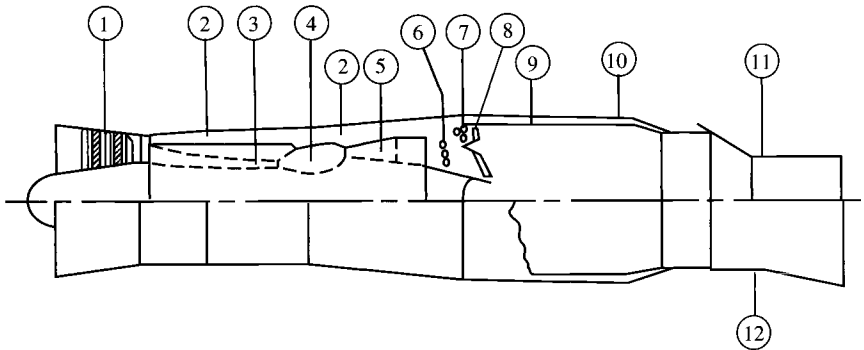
Pratt & Whitney F100-PW-100 augmented turbofan engine (Ref. 67): 1) three-stage fan; 2) bypass duct; 3) core engine compressor; 4) main burner; 5) turbine; 6) fuel injectors for core engine gas stream; 7) fuel injections for bypass airstream; 8) flame stabilizer for afterburner; 9) perforated afterburner linear; 10) afterburner case; 11) nozzle closed to minimum area; and 12) nozzle opened to maximum area.
